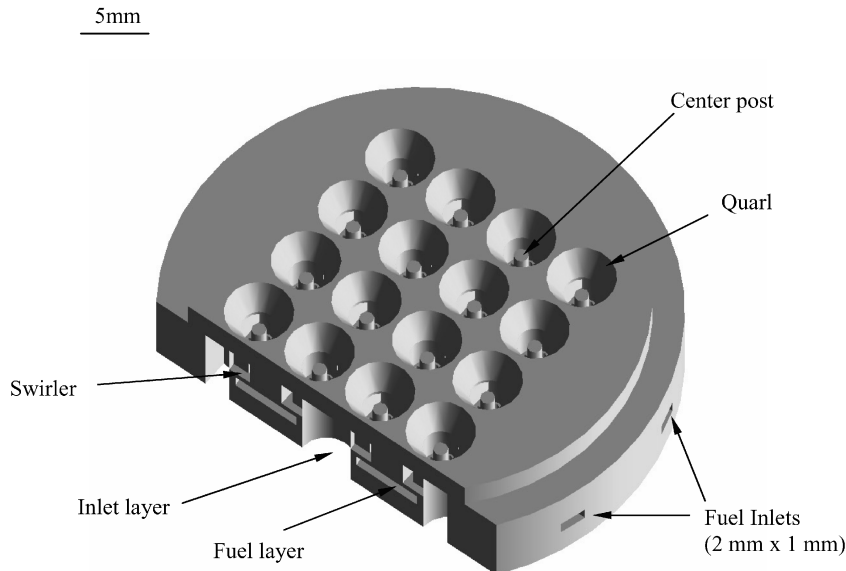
Angled three-dimensional CAD image of the mesoburner array.
